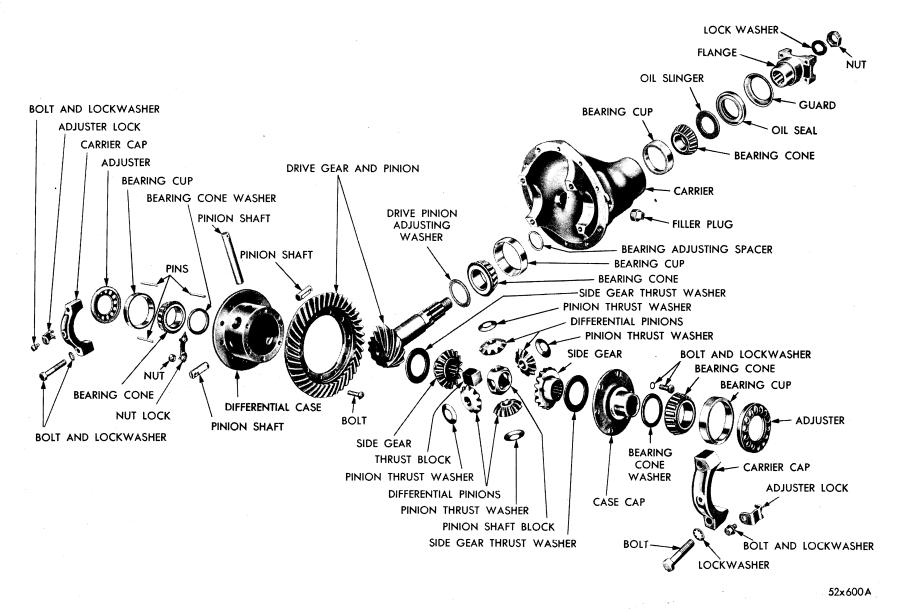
Rear Axle (Disassembled View) C 72, C 73, including C 71, C 72
